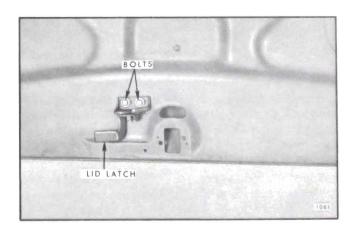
Engine Compartment Lid Latch Assembly
